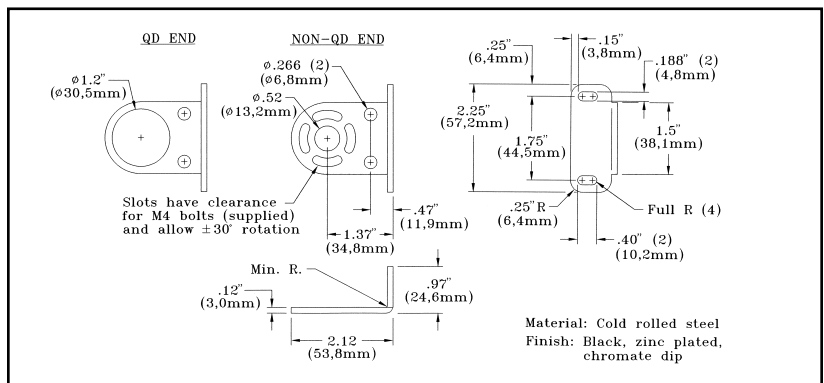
Emitter and Receiver Mounting Bracket Dimensions.
